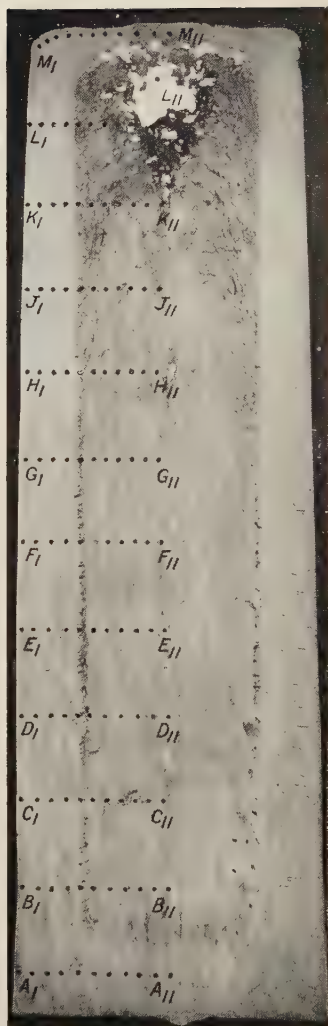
Sulphur Print of the Ingot Section, showing positions of drill holes.
